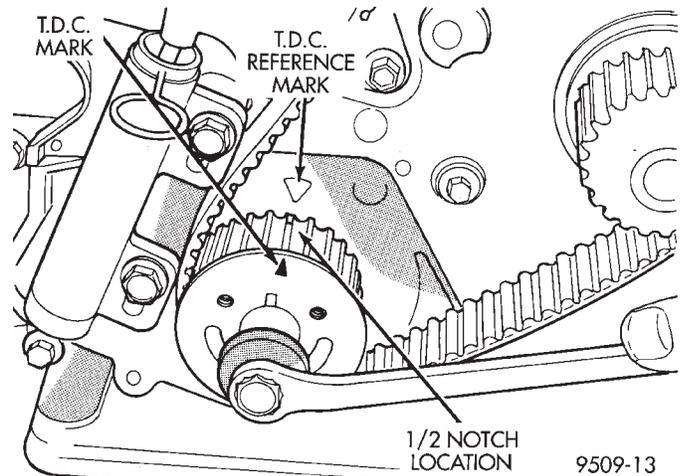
Adjusting Crankshaft Sprocket for Timing Belt Installation
